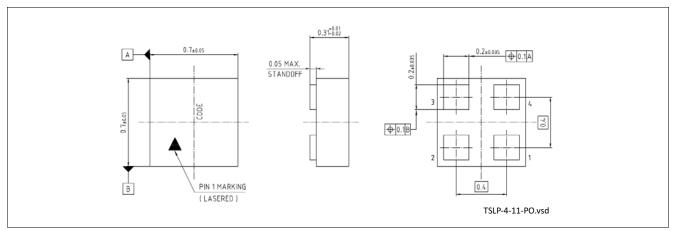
TSLP-4-11 Package Outline (top, side and bottom views)
